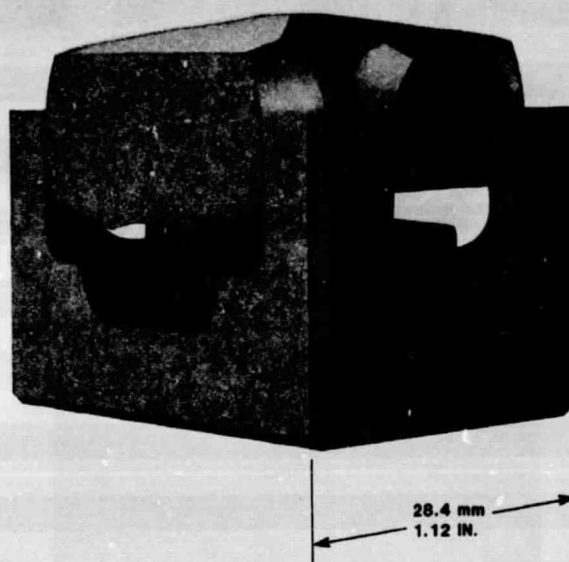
Redesigned Four-point Hot MOR Test Fixture
